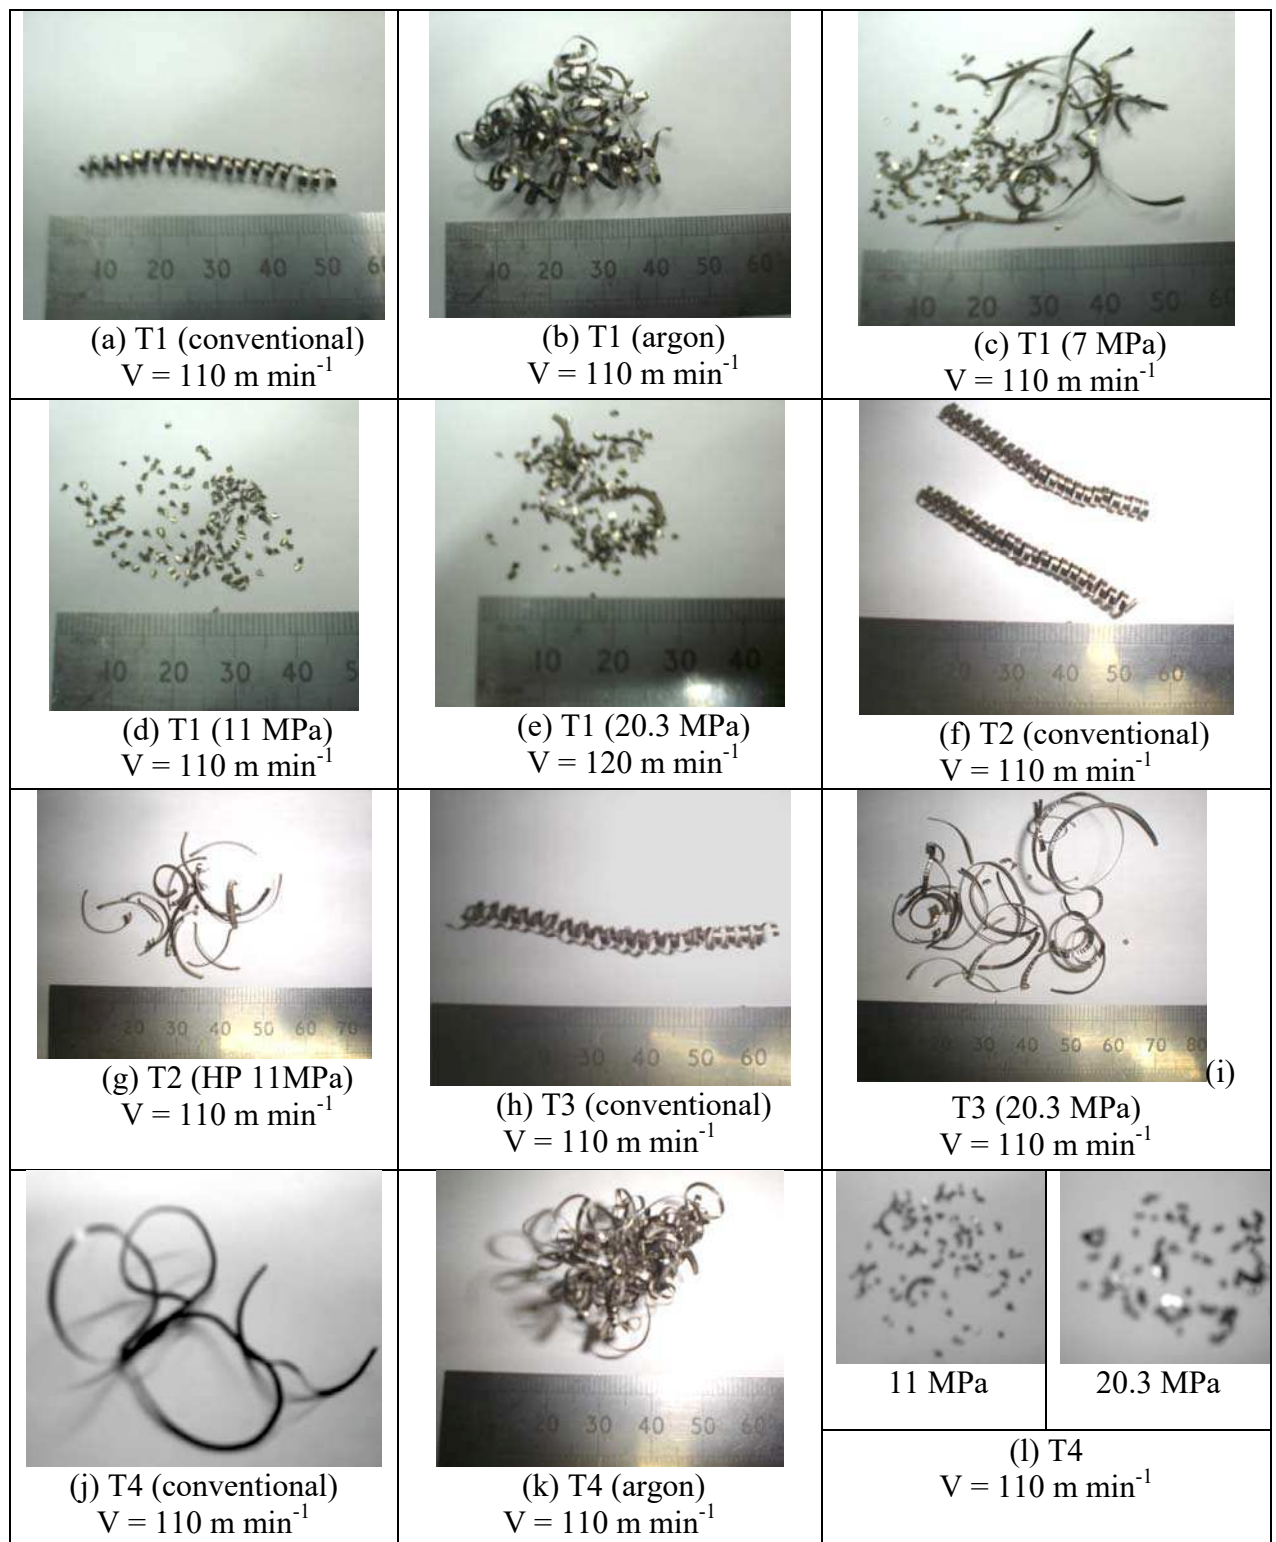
Chips generated when machining Ti-6Al-4V alloy with different carbide tool grades under various cutting conditions: (a) continuous tubular chip; (b), (f), (h) and (k) continuous and snarled chips, (c), (g) and (i) partially segmented chips, (d), (e) and (l) segmented C-shaped chips.
